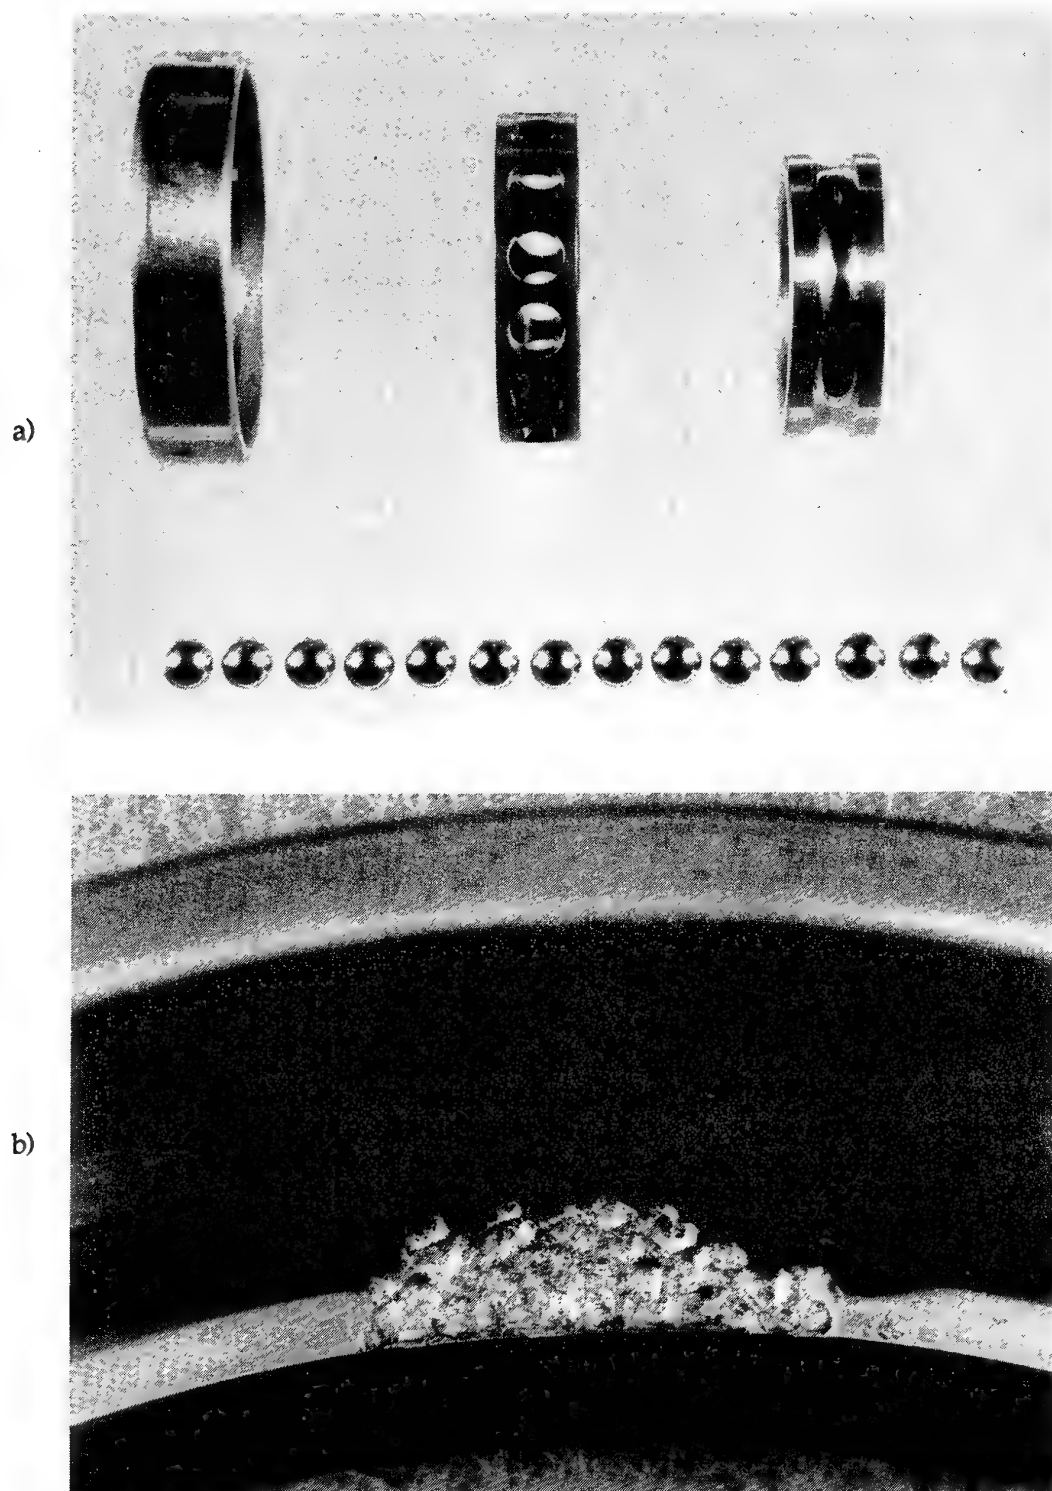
a) Disassembled NSK 7006C Angular Contact Bearing. b) Outer Race Failure.
